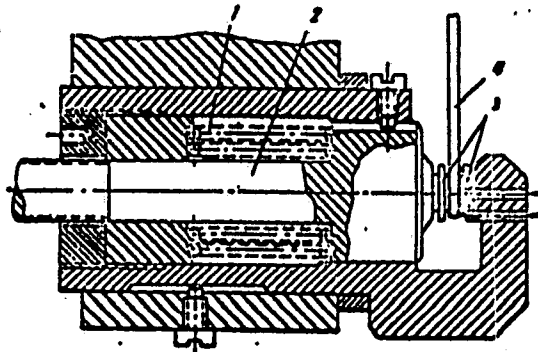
Schematic illustration of loading device. 1 - calibrated loading spring, 2 - spring-load transmitting rod, 3 - test specimens, 4 - friction disk
